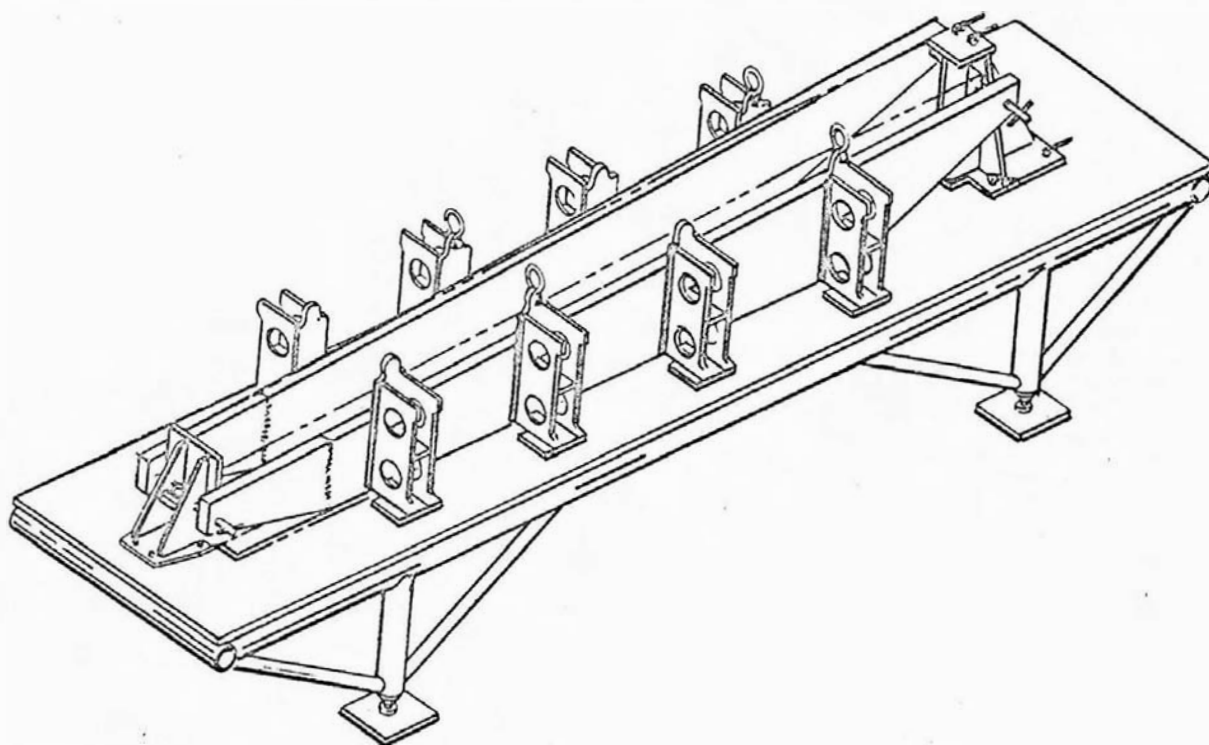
Outboard Thrust Post Assembly, Assembly Fixture
